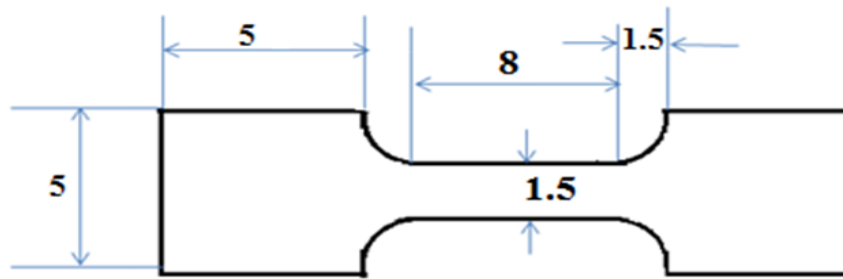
Schematic of dimensions of tensile specimen. All dimensions are shown in mm.
